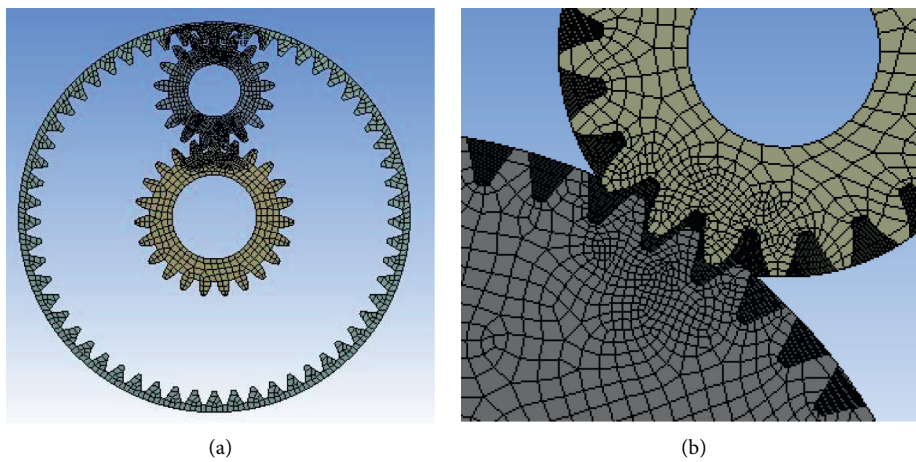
Finite element mesh of gears. (a) Planetary gear. (b) Helical gears.
